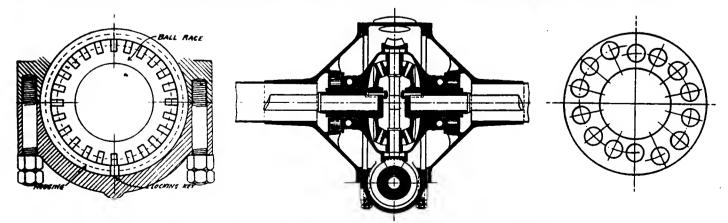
Method for locking adjustment of bearings shown in Fig. 8; Fig. 10—Method of mounting worm wheel on roller bearings with ball thrusts, and Fig. 11—Staggered balls in old thrust race to prevent uneven wear
